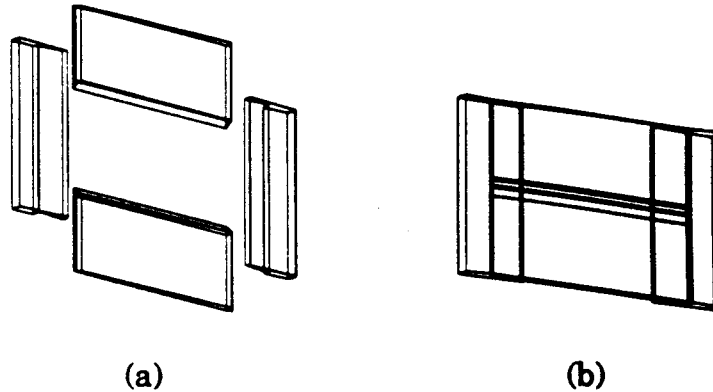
Slit Views - (a) Exploded View (b) Assembly
